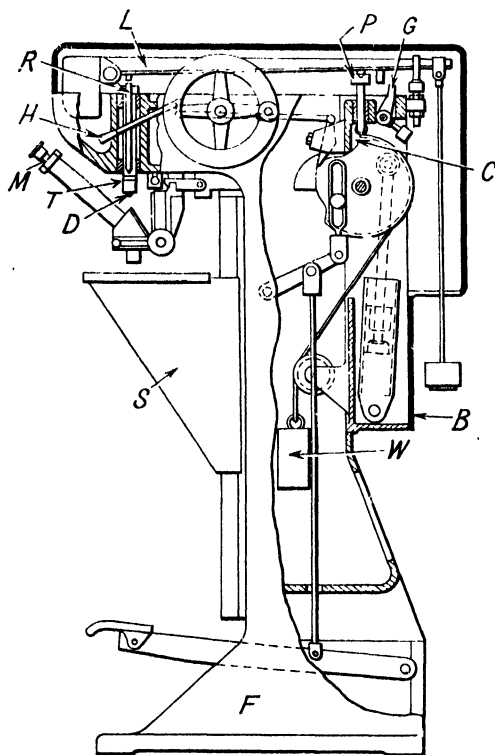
VICKERS HARDNESS TESTING MACHINE
